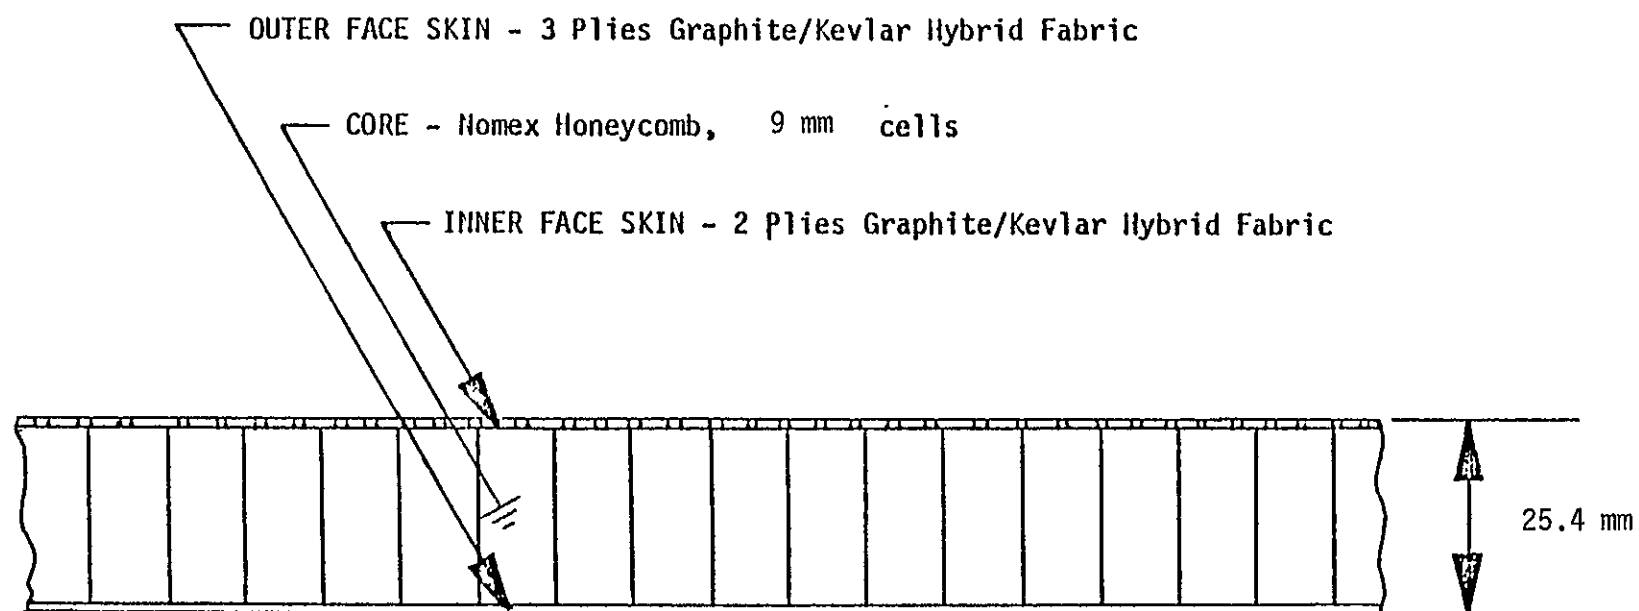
Fan Reverser, Outer Barrel and Blocker Door Construction
